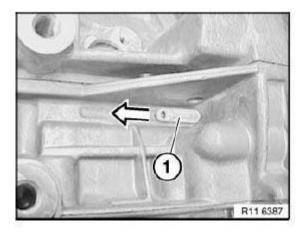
Identifying Fastener Courtesy of BMW OF NORTH AMERICA, INC.
